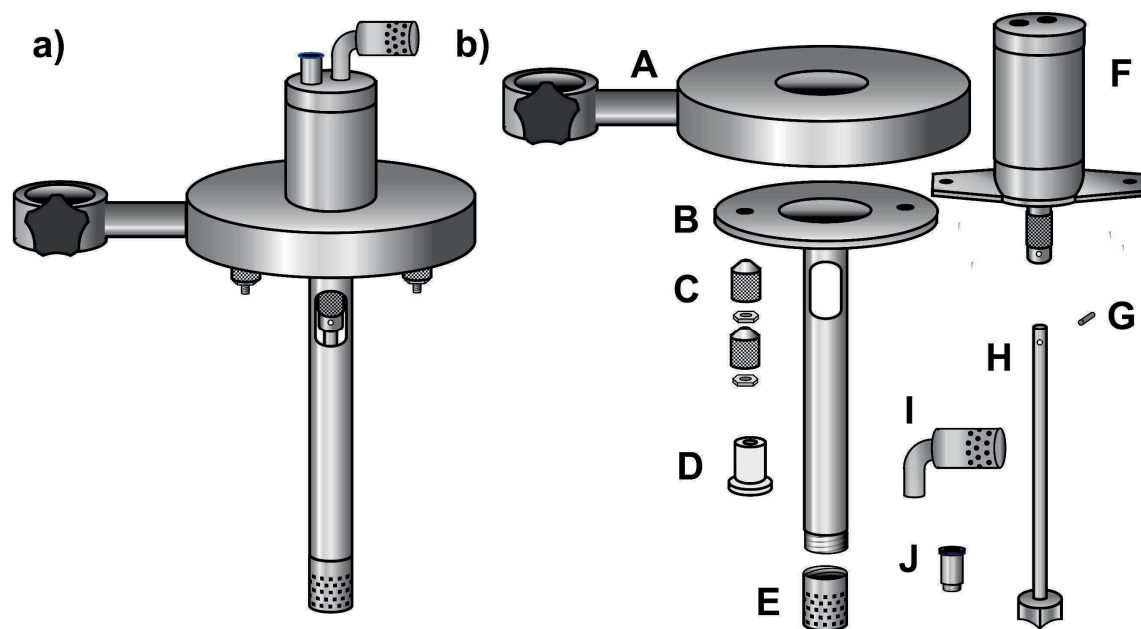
a) Assembled shear force mixer b) Explosion drawing of shear force mixer parts with a detailed description given in Table 2.
